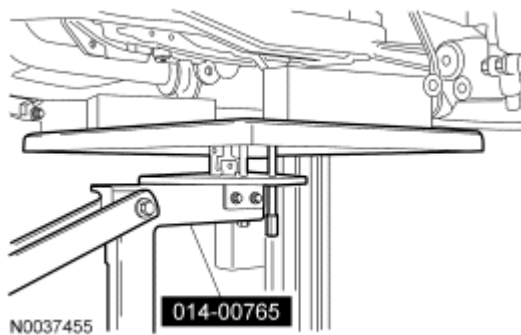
Positioning Special Tool (014-00765) Under Subframe Assembly
